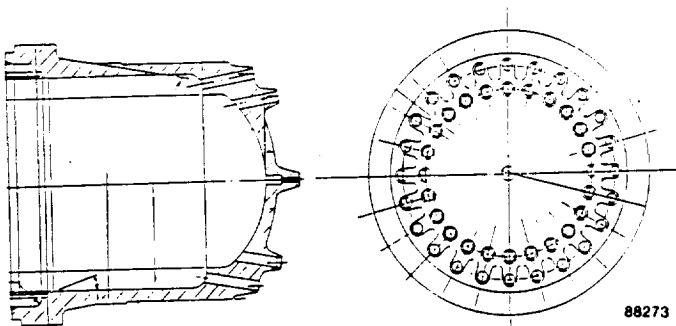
Mod II Configuration No. 4 Heater Head Housing
